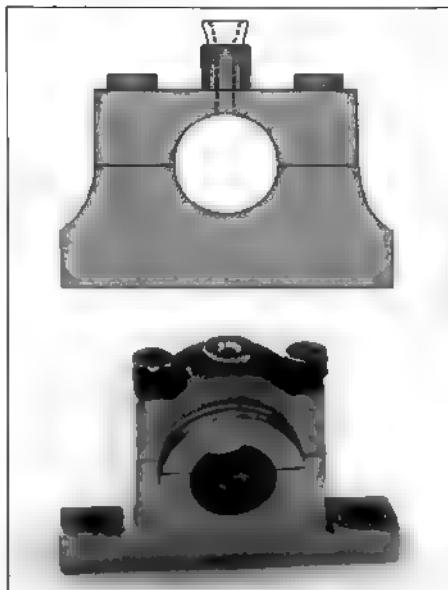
Top, a design for a brass main bearing with lubrication hole; bottom, a typical example of one.
